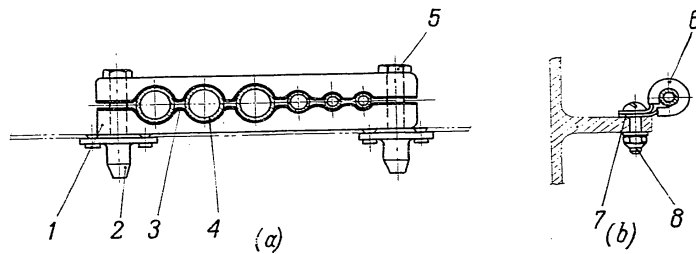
PIPELINE STANDARD ATTACHMENT FITTINGS
